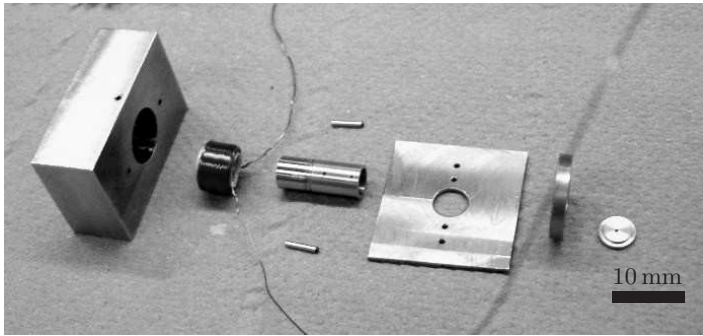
The different parts of the display before assembly; from left to right: magnetic house, coil, assembled central valve and steel dowel pins, magnetic cover, non-magnetic high pressure chamber and cover of the cylinder with a hole to be connected with the tactile display
